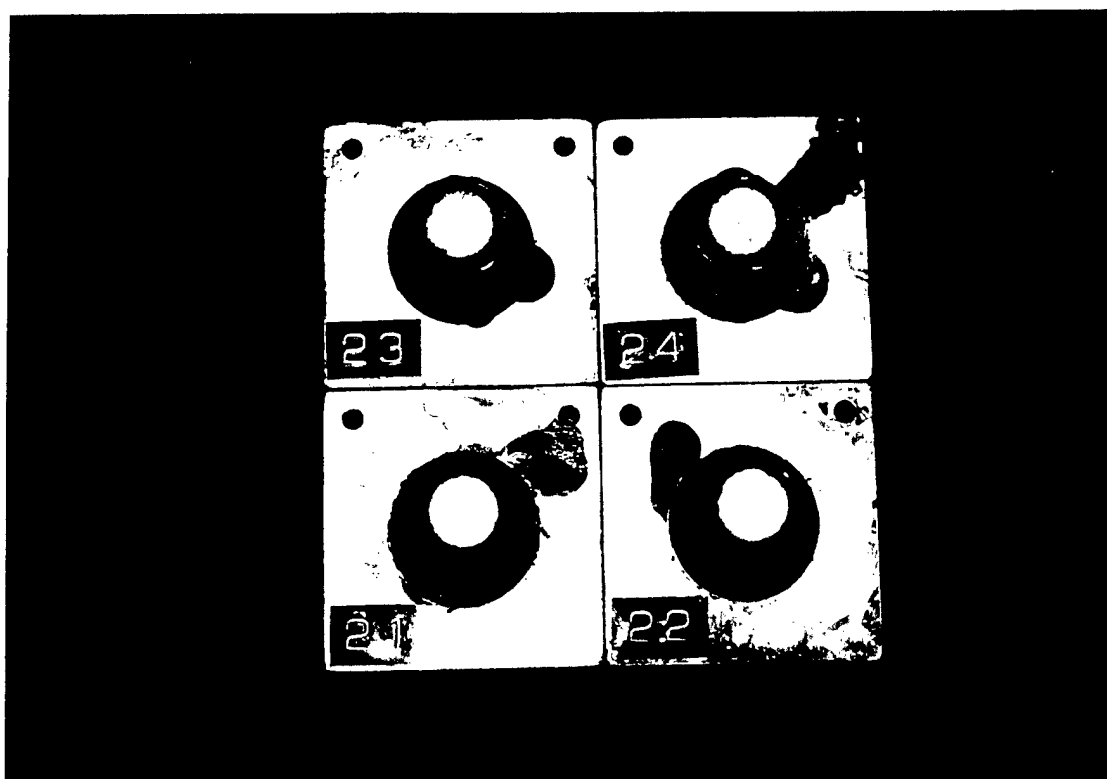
H11 Chromium Hot Work Tool Steel Nuts With Cadmium Electroplate After 30 Days of Salt Spray. Reduced 25%.
